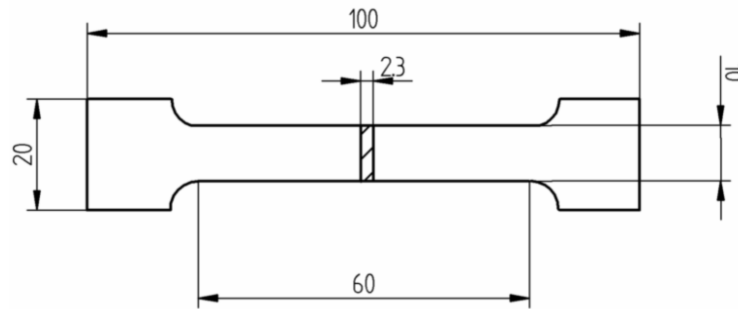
Dimensions (mm) of tensile test samples for impulse welding
